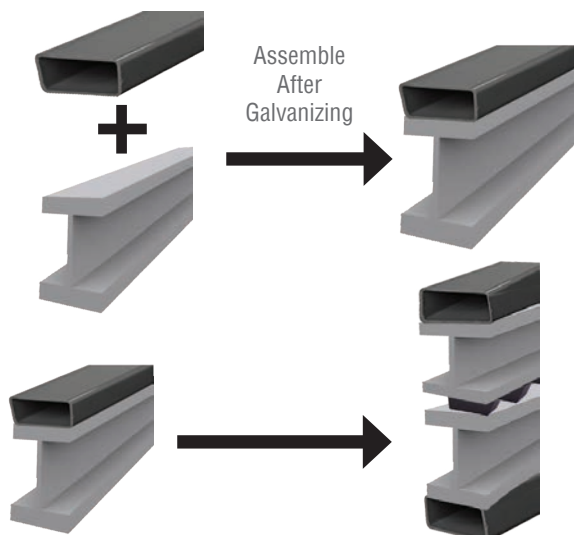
Assemble asymmetrical sections back to back or galvanize individual parts as separate items and assemble after galvanizing
